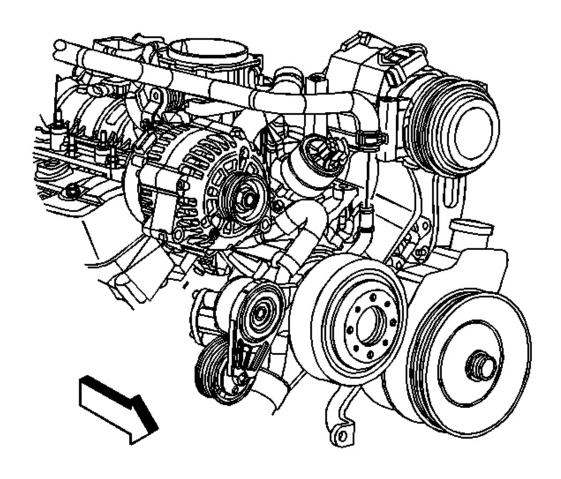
Intake Manifold Hose Courtesy of GENERAL MOTORS CORP.
